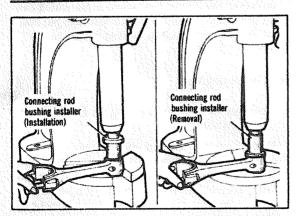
Installing or Removing the Connecting Rod Small End Bushing
